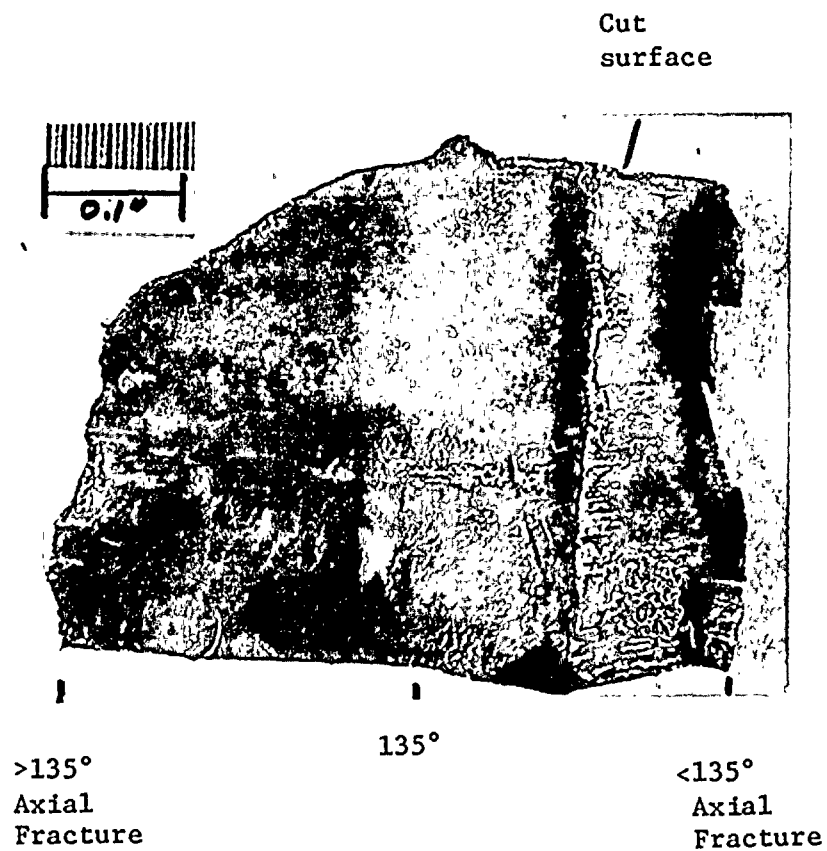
Fractography was performed on two axial fracture surfaces 1-1/2" from the bottom of the top portion of Tube R44-C55
